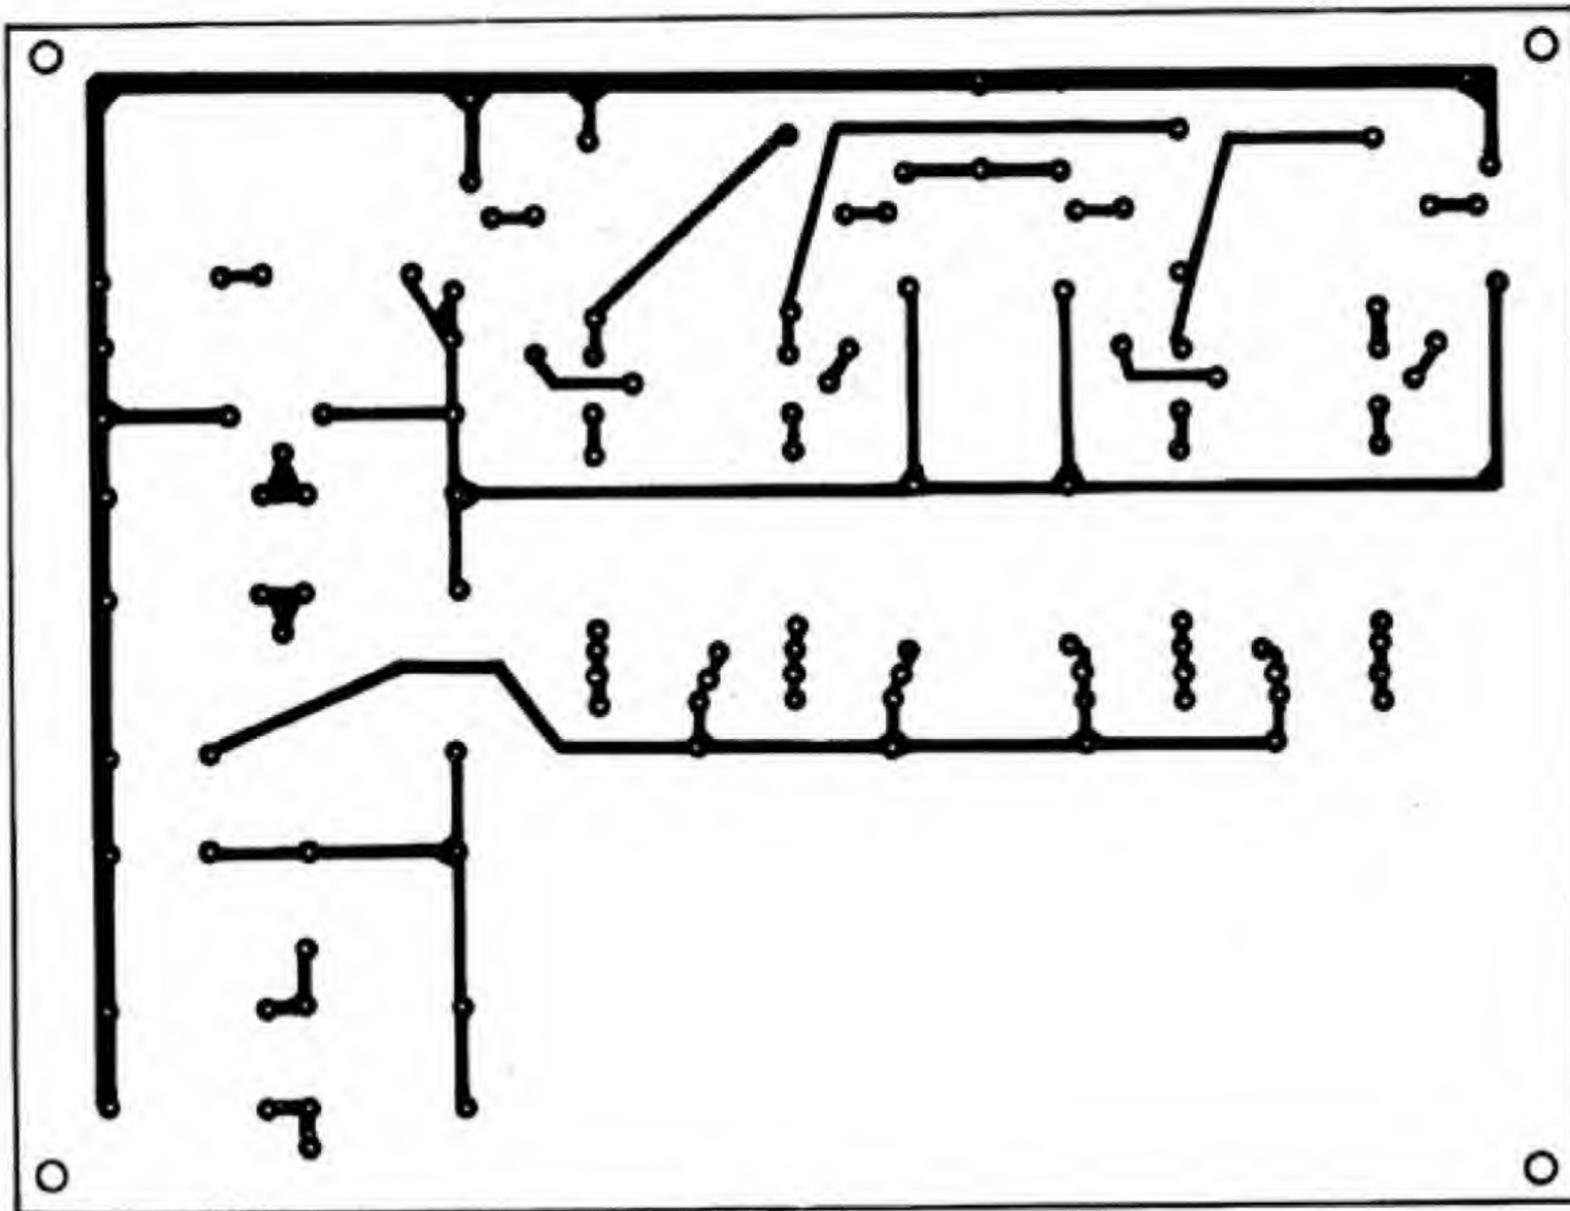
Actual-size PCB layout for the circuit shown in Fig. 1.
